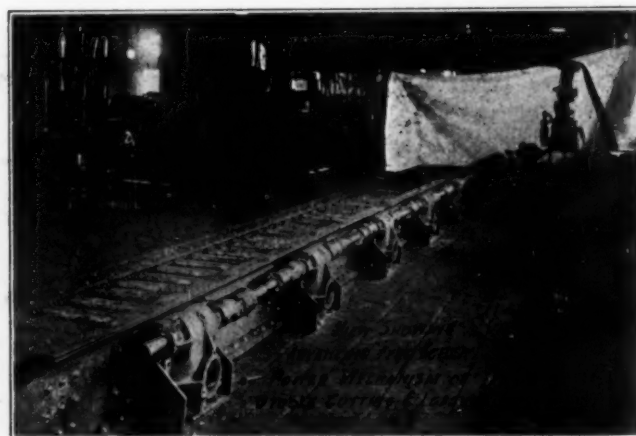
ADVANCING FEED-SCREW POWER MECHANISM OF NO. 2 MACHINE
